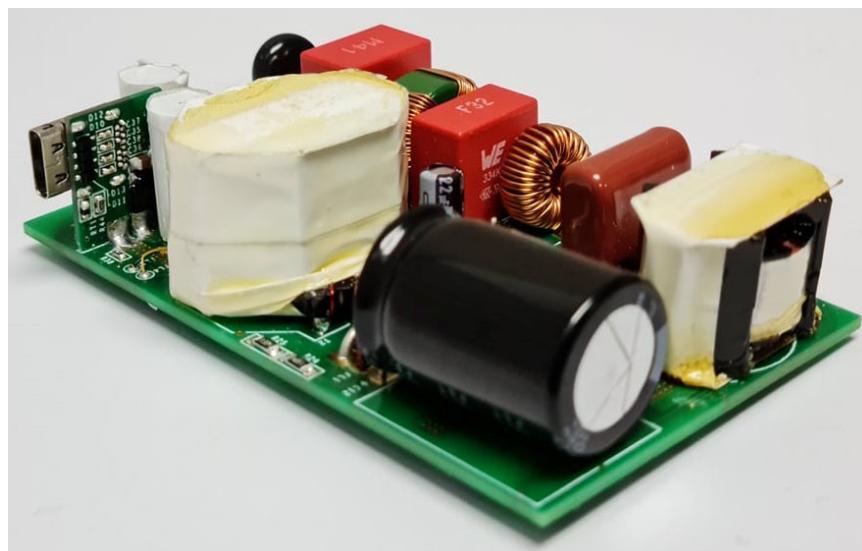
Populated Circuit Board Photograph, Entire Assembly.
